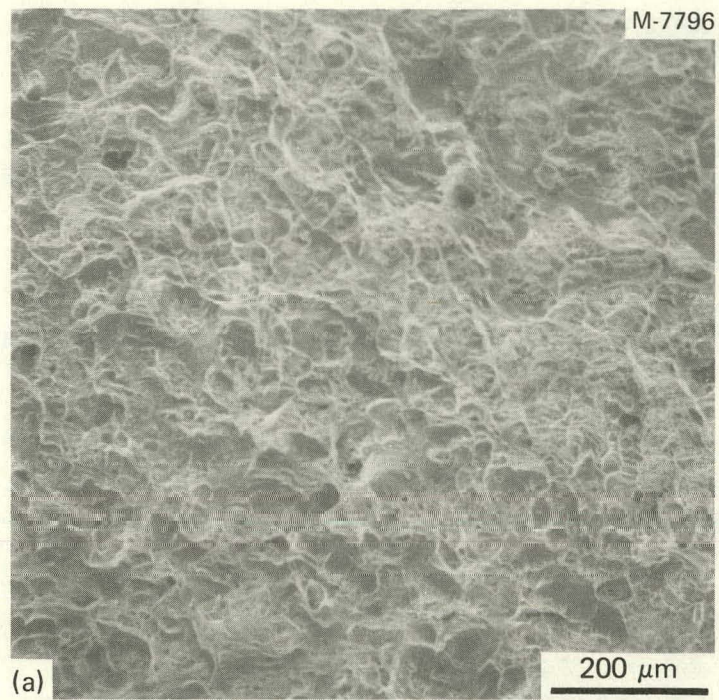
Fracture Surface of CPF8M(H) Specimen that Ruptured at 538°C after 971.4 h.
